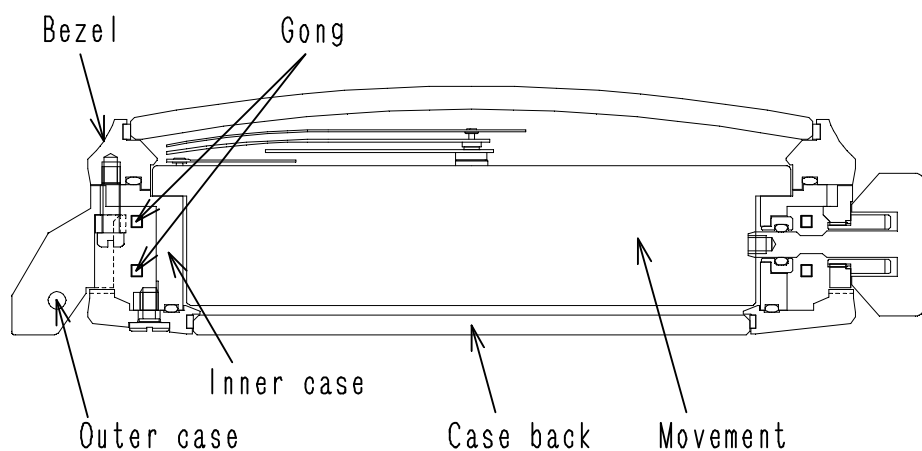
Sectional view of SPRING DRIVE Minute Repeater.
